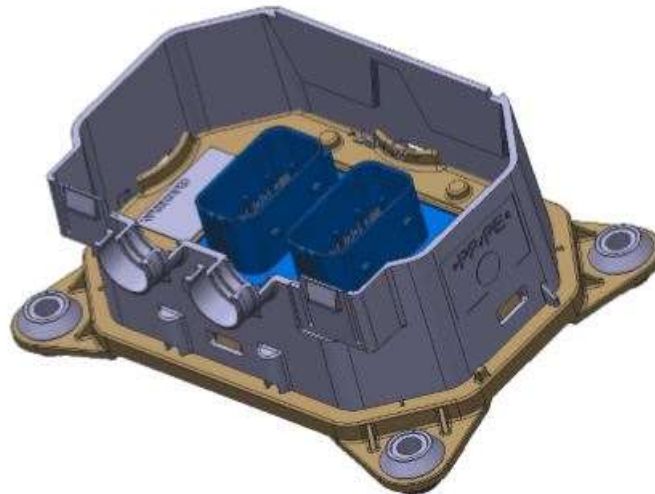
CAD model of the FCIOM, with I/O connectors and enclosure showing, and with the PCB inside (FCIOM2, 2016).
